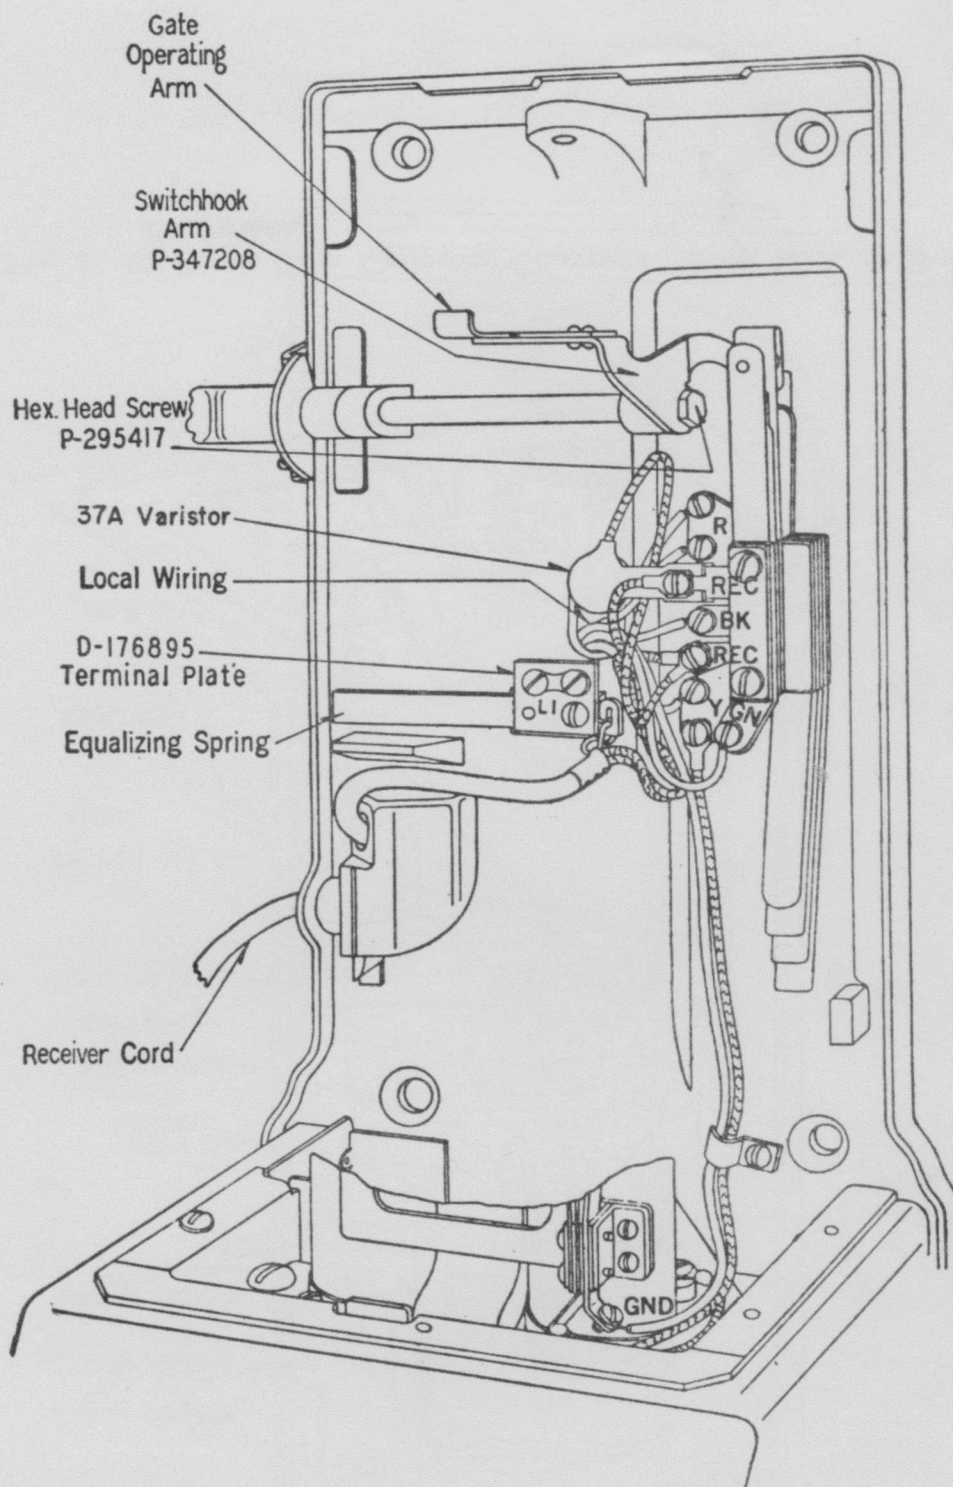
166-Type Coin Collector—Lower Housing and Backplate
